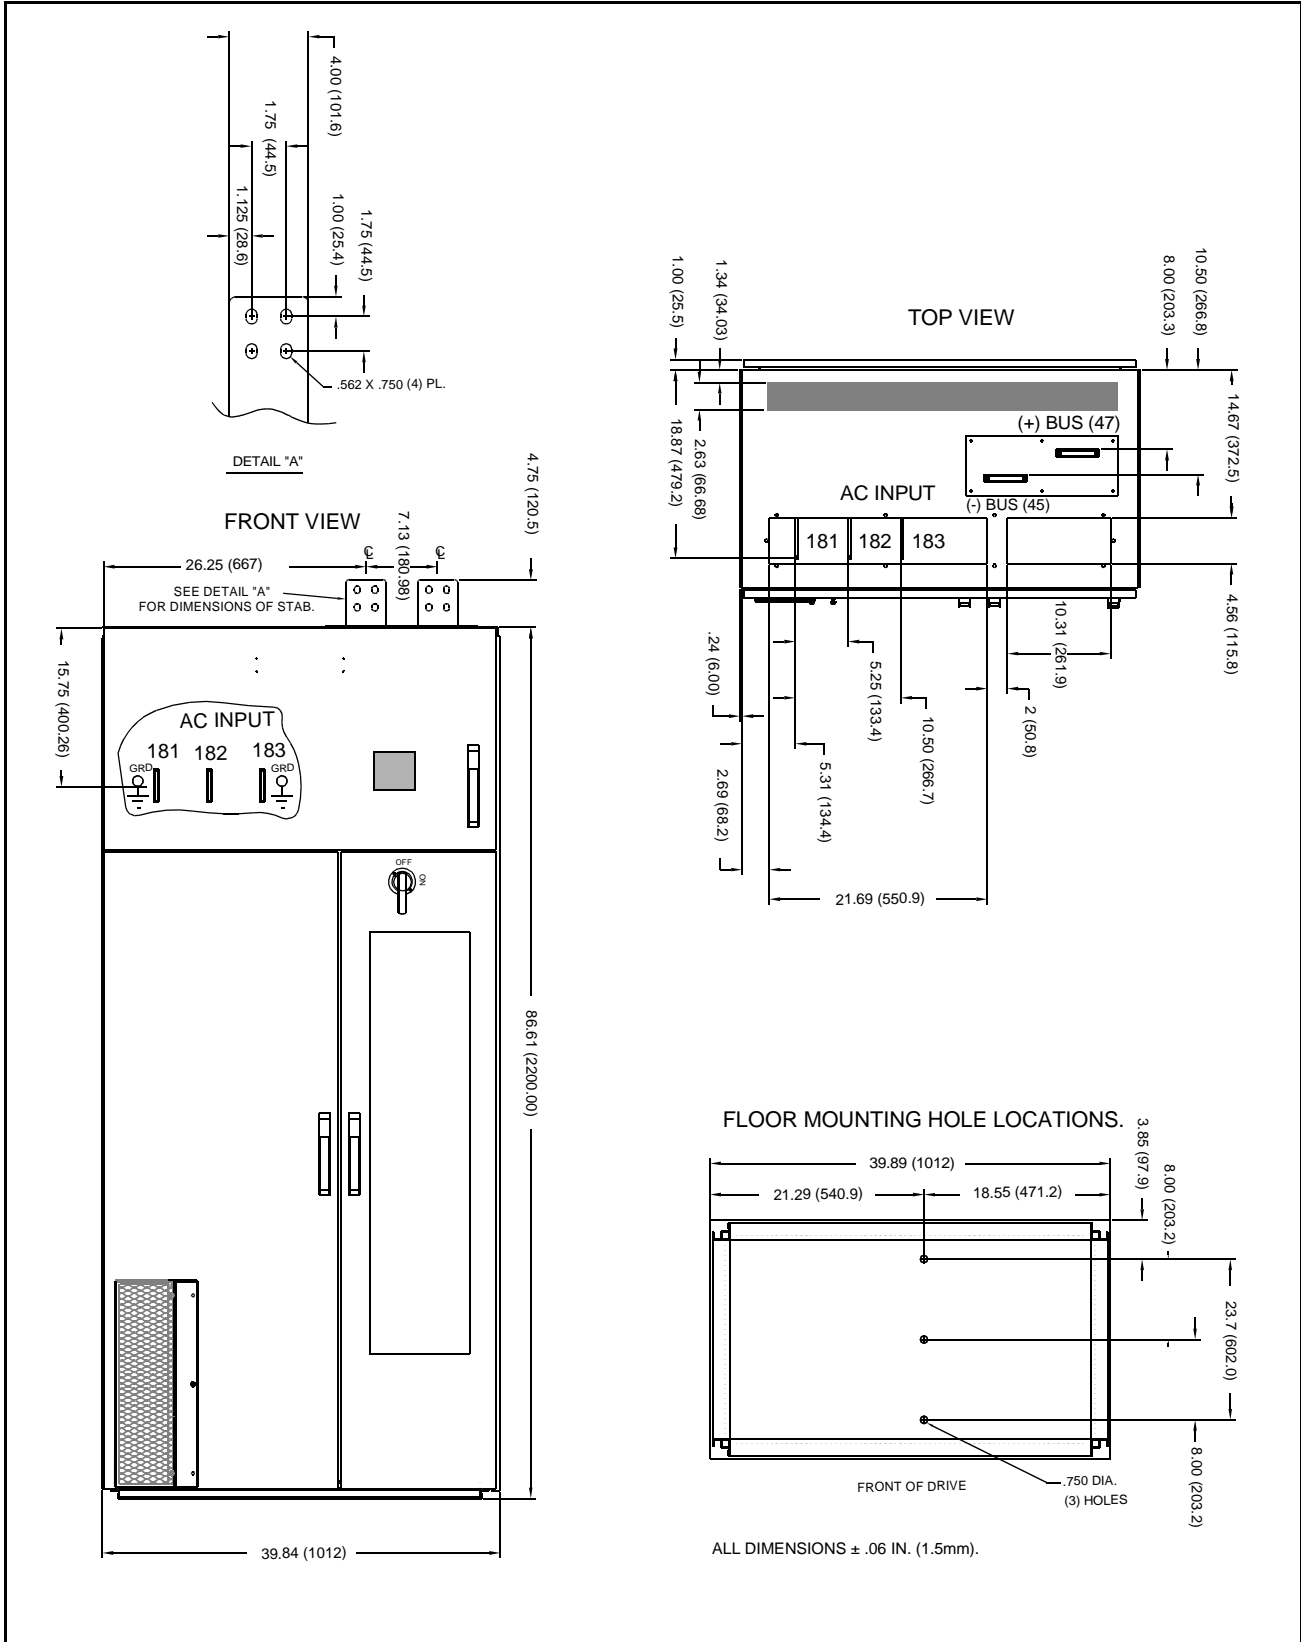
445A SB3000 Power Module Mounting Dimensions
